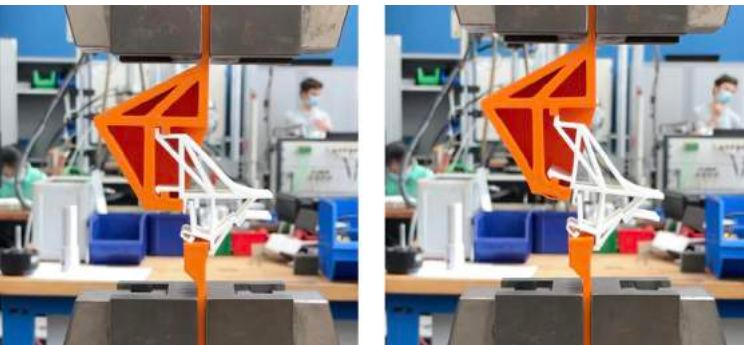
Tensile test specimen 8, starting position - failure attachment (Own)
